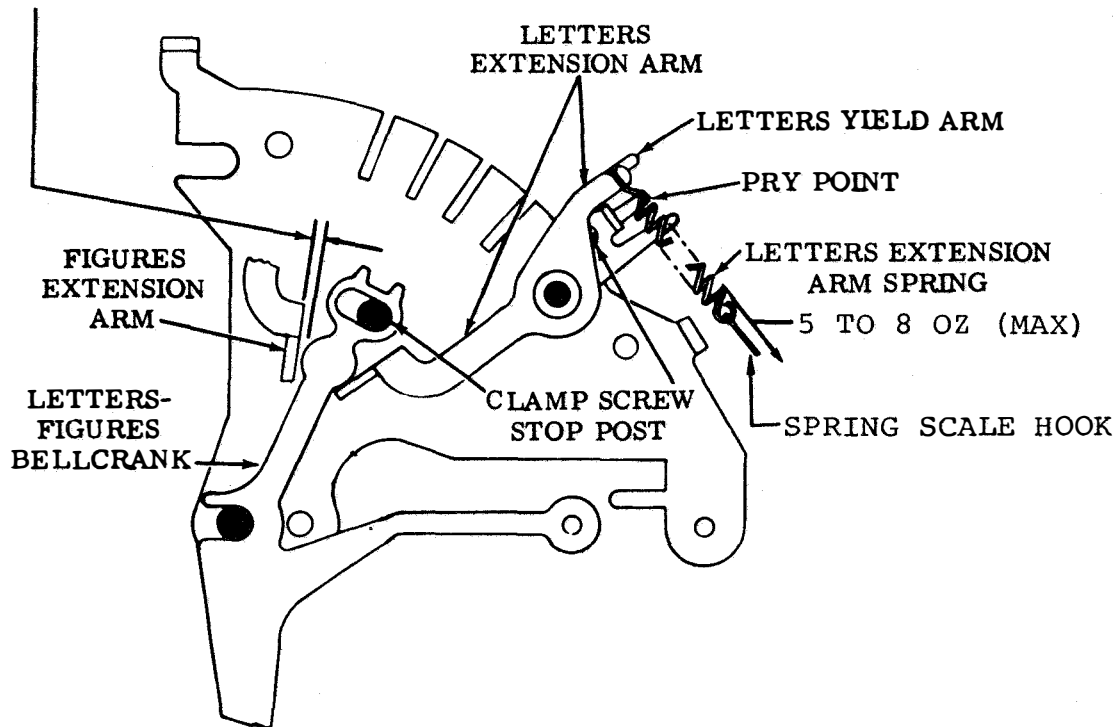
LETTEPS-FIGURES Yield Arms, LETTERS Arm Assembly Spring, and LETTERS Extension Arm Spring, Front View
